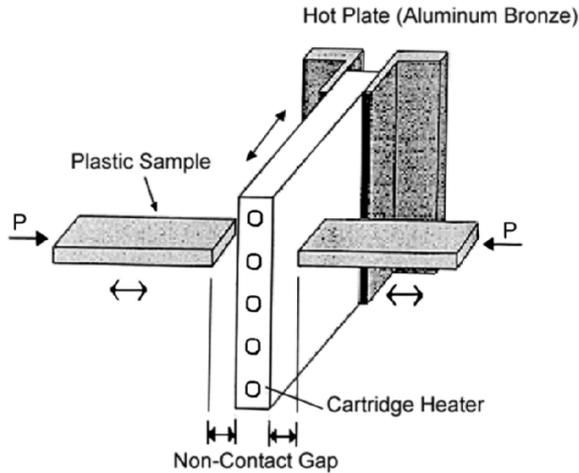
Non-contact hot plate welding. Parts being welded are placed near the hot plate, separated from it by a distance referred to as the non-contact gap. The hot plate is removed during the change-over phase, and pressure is applied to hold the parts in intimate contact during weld cooling and solidification.
